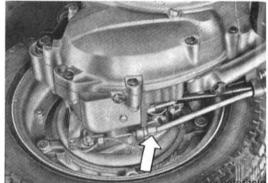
Brake adjustment. Fig. 13 - Reglaje frenos.
